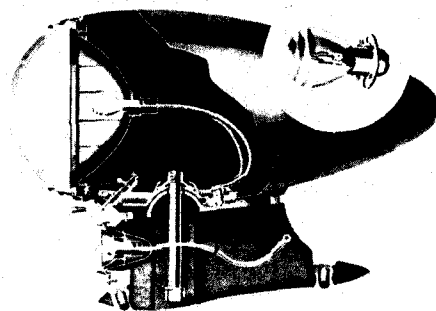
Sectional view of headlamp, showing adjusting screw for aiming beams. Insert shows special pre-focused bulb.
